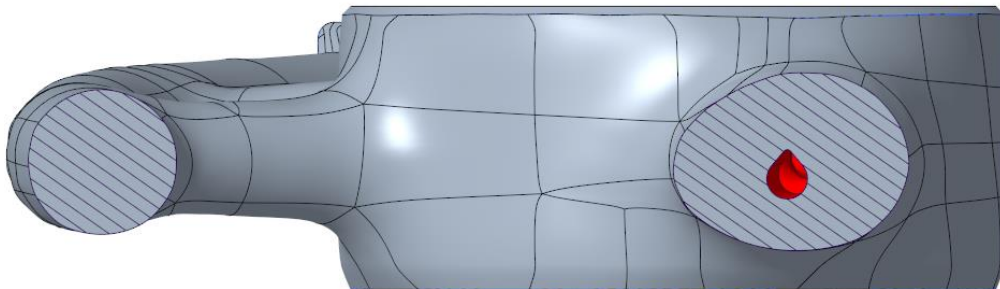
Cross-section of Rocker Arm 316L, teardrop-shaped internal oil channel
